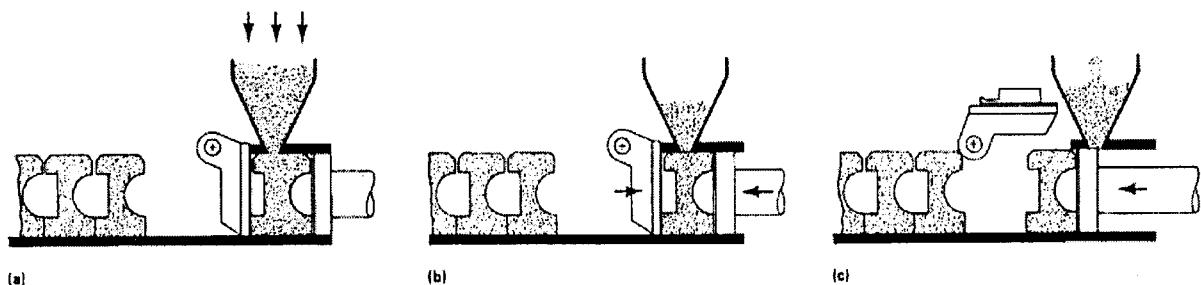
Blow-fill pressure squeeze molding machine making vertically parted molds. (a) Molding chamber filled with sand. (b) Sand compacted by squeeze pressure. (c) Finished sand mold pushed out of molding chamber
